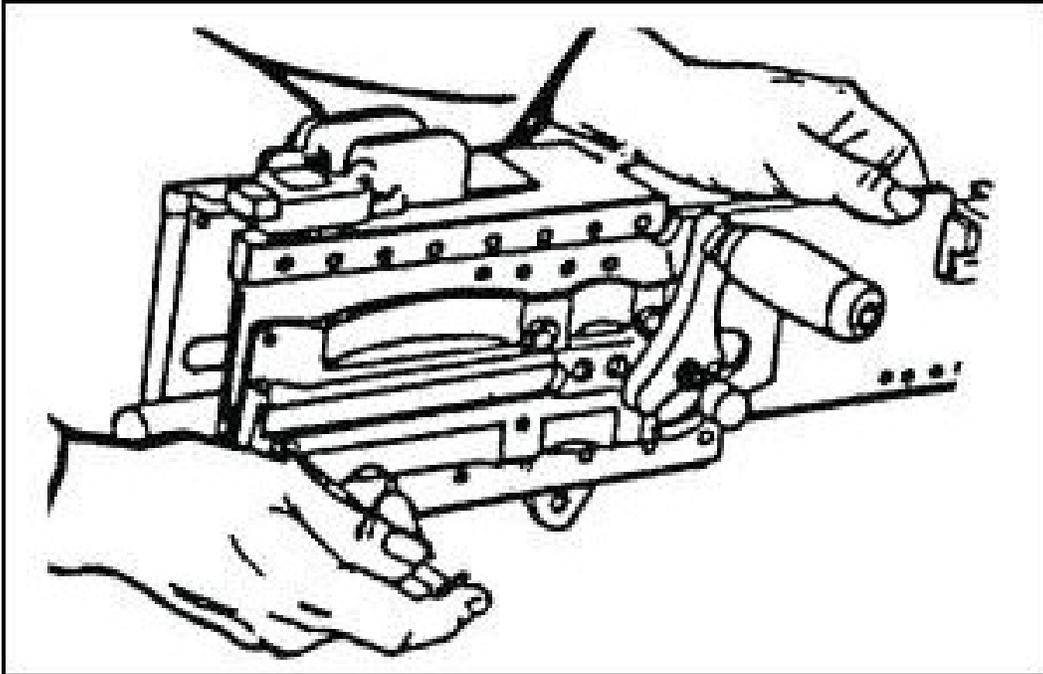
ST-1025_16 (Removal of the barrel buffer and barrel extension assemblies)
